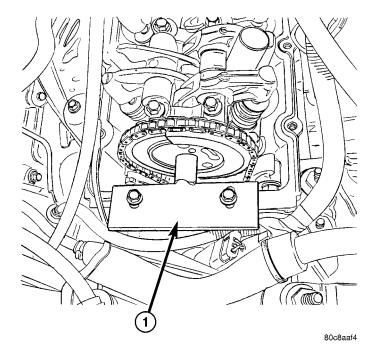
Special Tool 8446 - Camshaft Sprocket Holder
